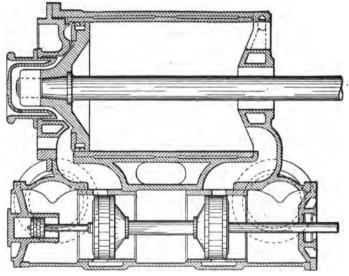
Section of Piston Valve and High-Pressure Cylinder of U. S. S. "Massachusetts" Showing Method of Balancing
